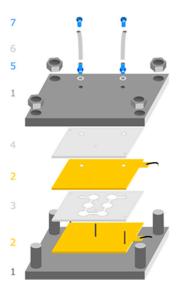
Exploded view of the mold used to apply the electric field during resin curing: six disc samples are produced at a time.
